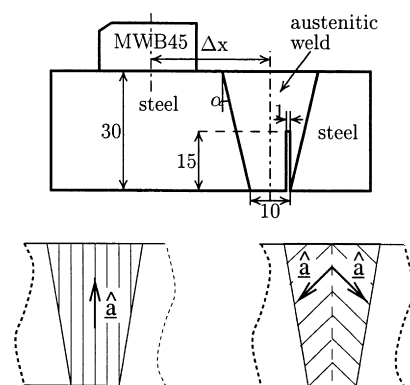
Parametric weld geometry; two models for austenitic weld structure.
